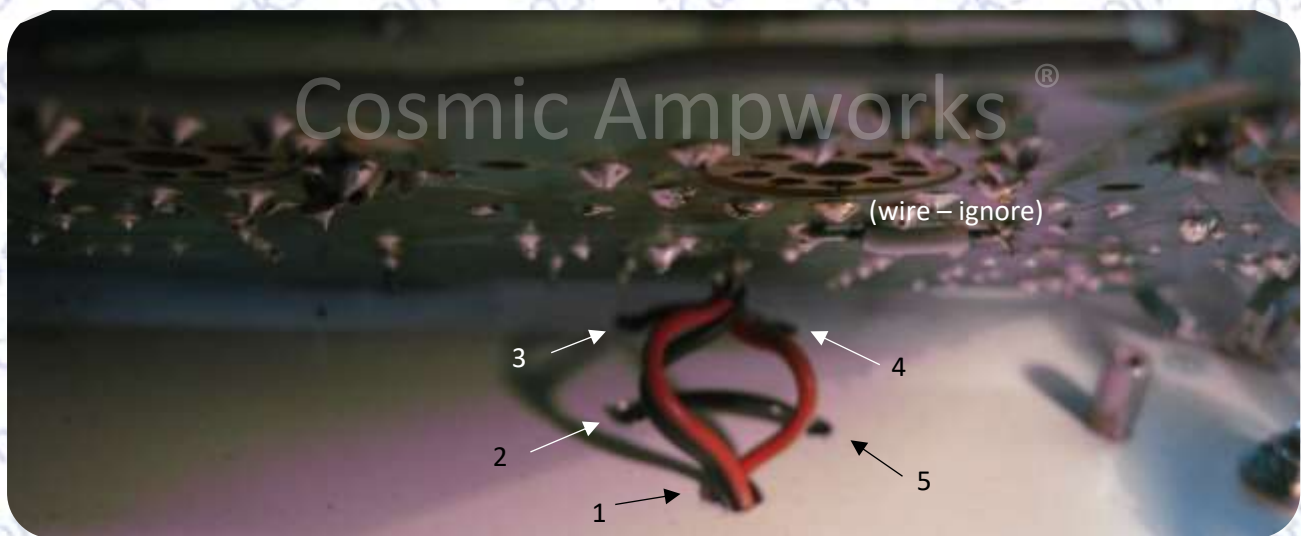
Drill five holes in the bottom of the chassis for attaching the heat sink that cools voltage regulator L7912 (viewed from inside the chassis). Hole no. 1 needs be wide enough to accommodate the 3 wires connecting to L7912 – smoothen its edges with a file. The other holes should be wide enough for attaching the heat sink with two tie wraps.
